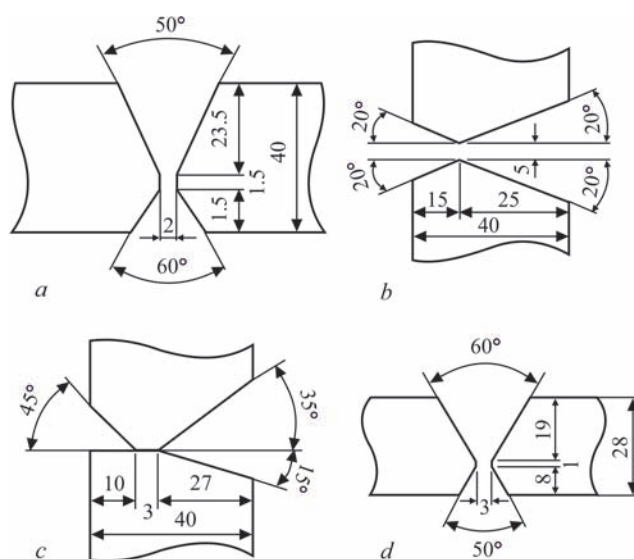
Typical groove for different welding methods and positions: a — SMAW; b — GTAW; c — SAW; d — FCAW
